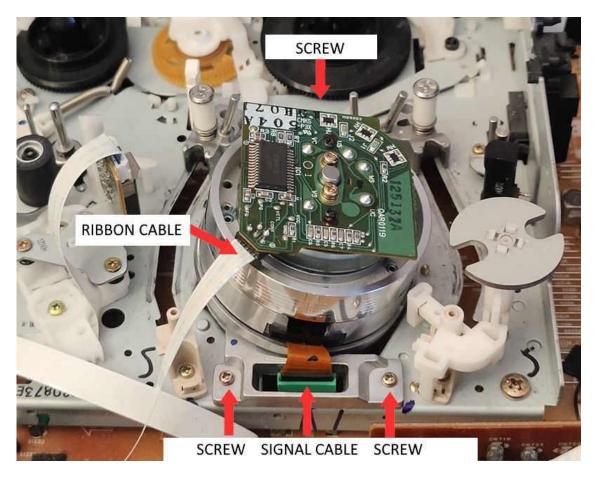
2 ribbon cables and 3 screws for video head drum mounting.
